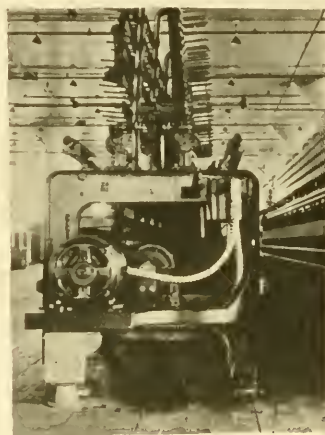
INDIVIDUAL MOTOR DRIVE FOR TWISTER FRAMES
